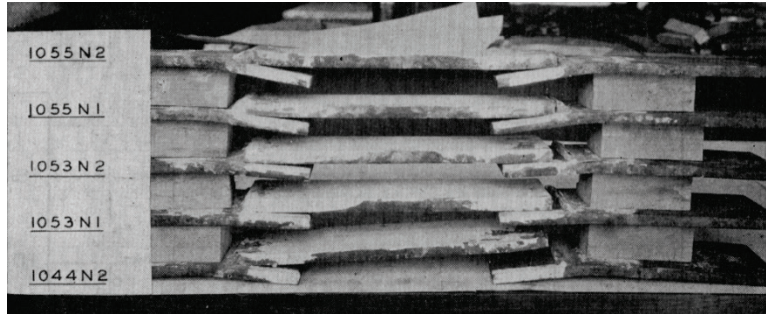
Deformation of single-lap single-weld specimens (ABW, 1931).
